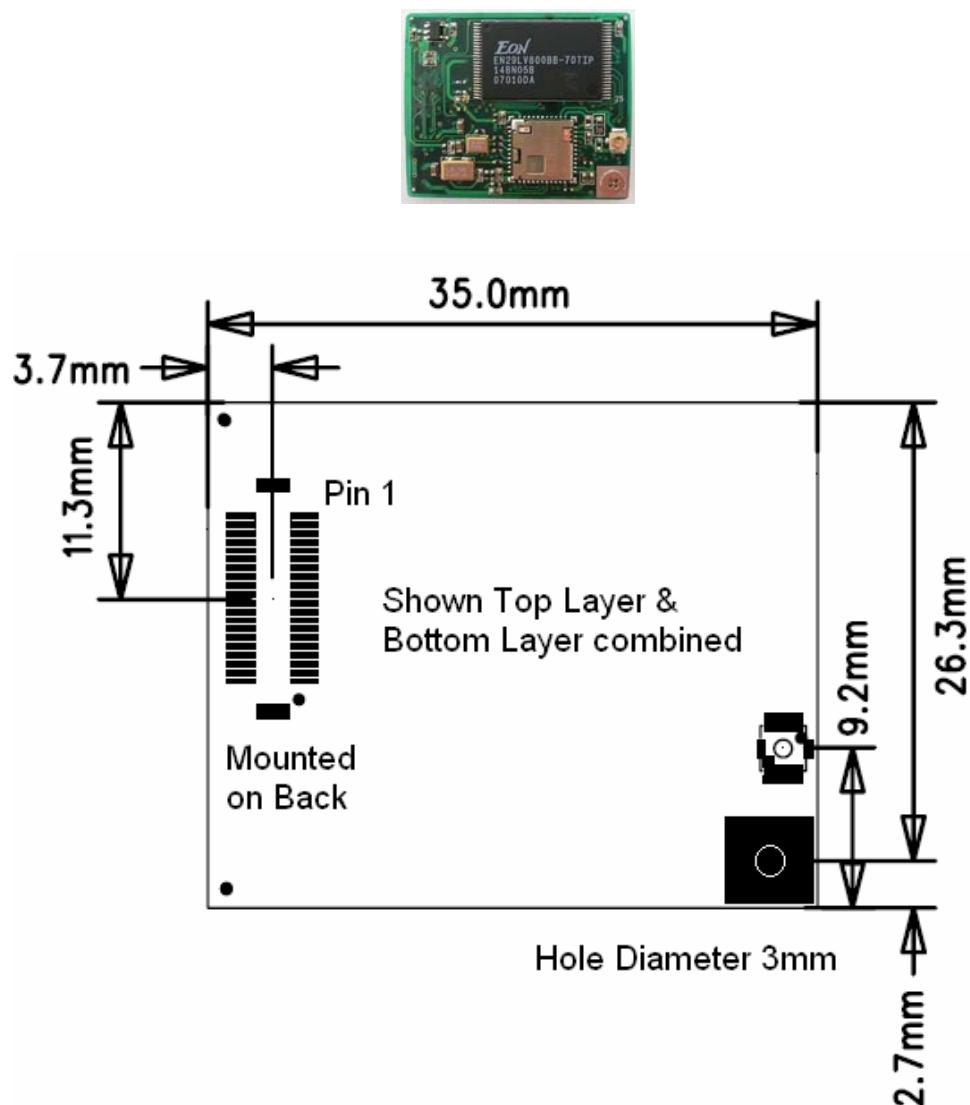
MLiS WiFi Module PCB and Interface Dimension
